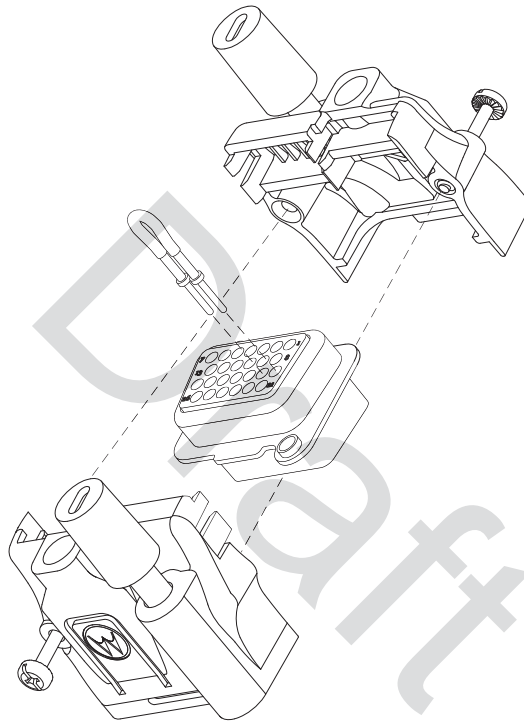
Exploded View of Accessory Connector Assembly (HLN6863_)
